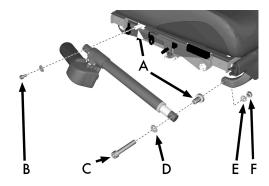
REAC leg rest actuator is held in place by two screw joints, (B) and (C).
